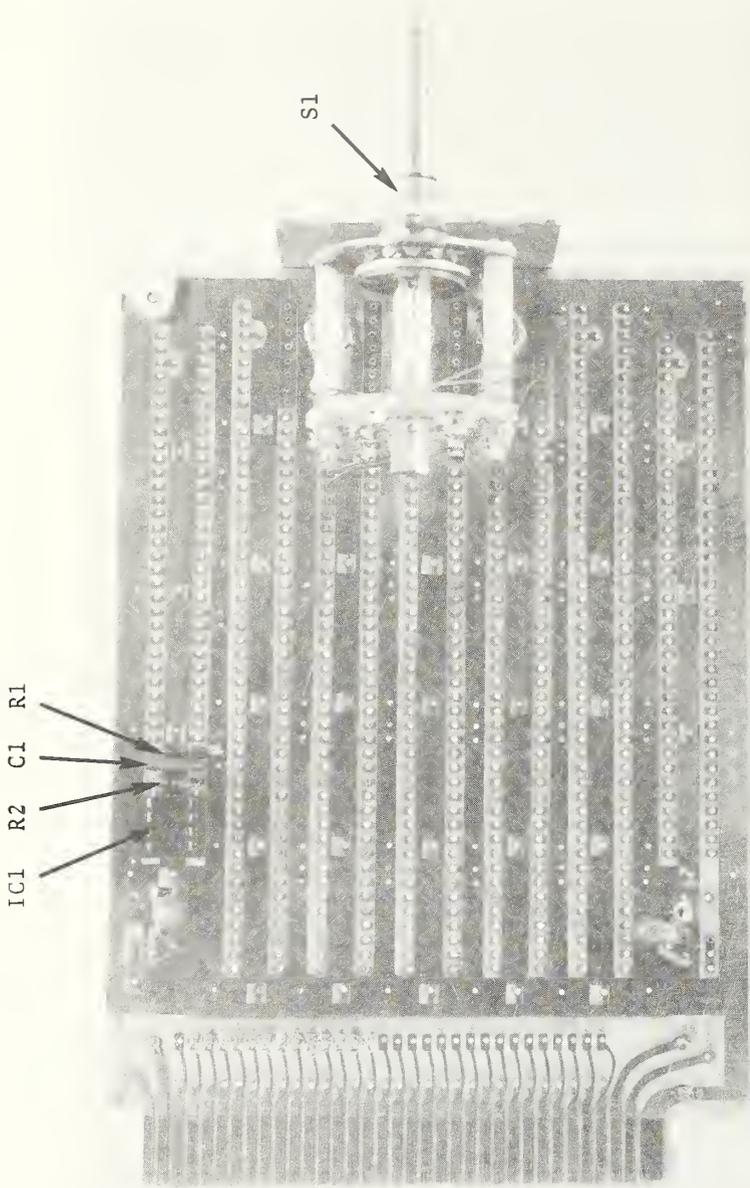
Monitor Channel Select Board (PCB 6), Parts Location
